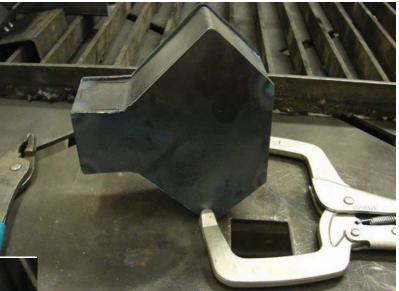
Positioning the vase to weld in the flat position.
